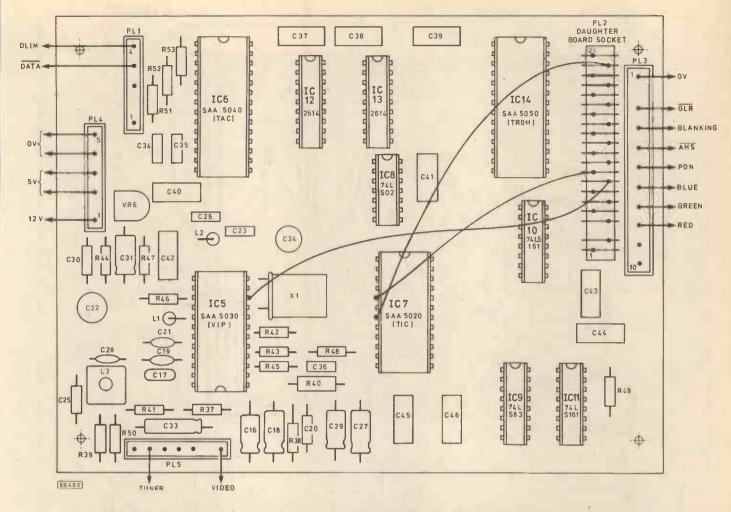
Component layout of the Decoder Board. Note C32 is not used on the supplied board
